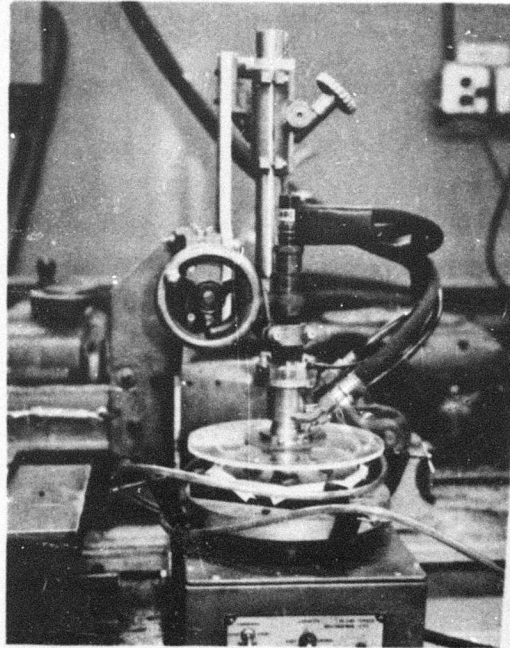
Plasma Arc Welding Torch Positioner,
